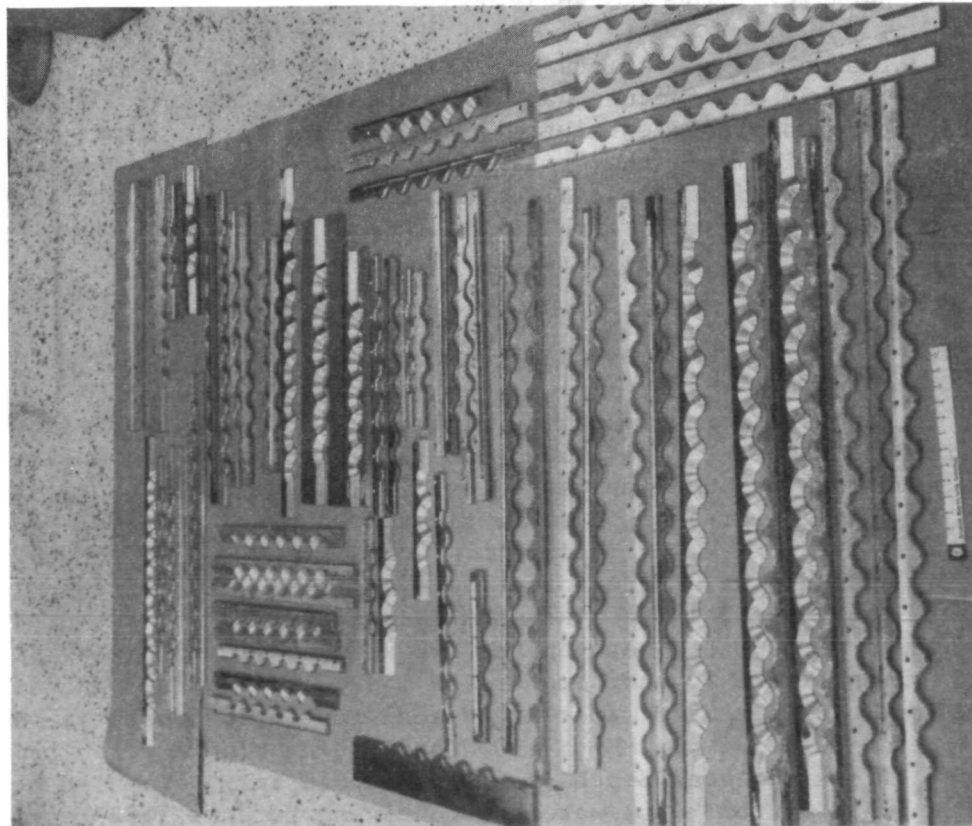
Assortment of Chill and Backup Bars to Make Various Rib and Spar Sub-assemblies for Master Weld Fixture
